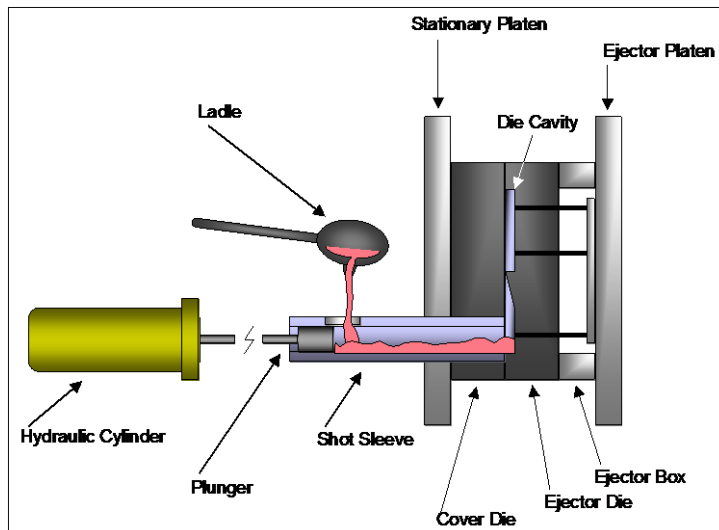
Graphical illustration of cold chamber die casting [32].
